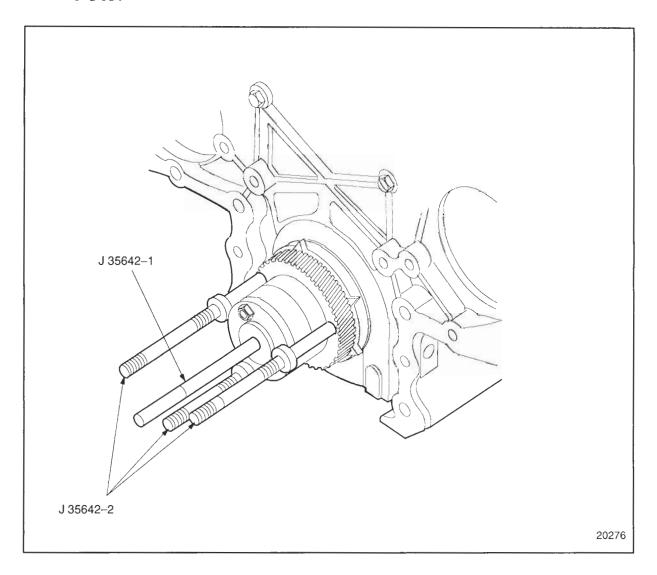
Installation of Crankshaft Timing Gear Removal Tools
